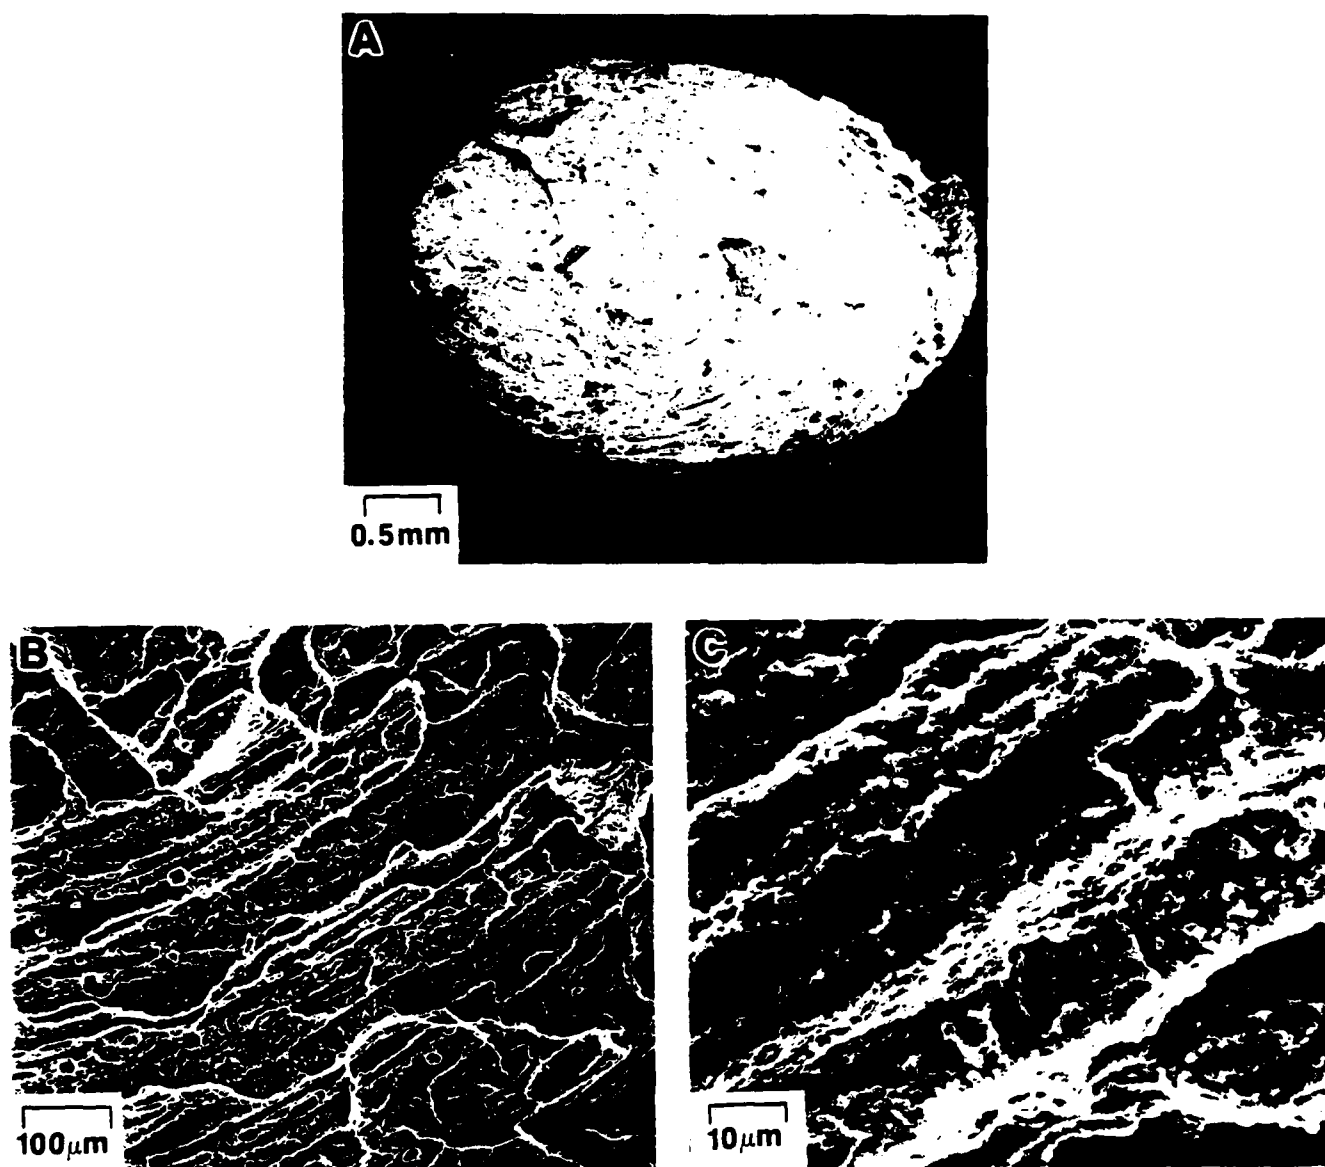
SEM fractographs of tensile tested Al-9Fe-4Ce inertia-friction weld produced at low axial force: (A) macroscopic fracture surface, (B) spiral pattern indicating metal flow during welding, (C) dimpled fracture surface at increased magnification.
